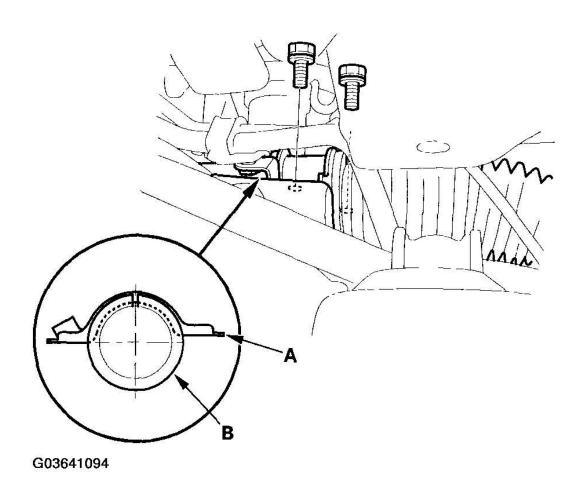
Removing Mounting Bracket And Cushion Courtesy of AMERICAN HONDA MOTOR CO., INC.
